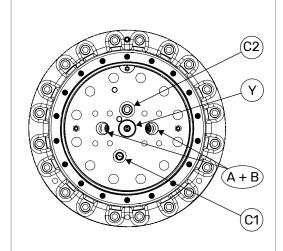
The hydraulic connections of a 2-speed C200 motor without brake.
